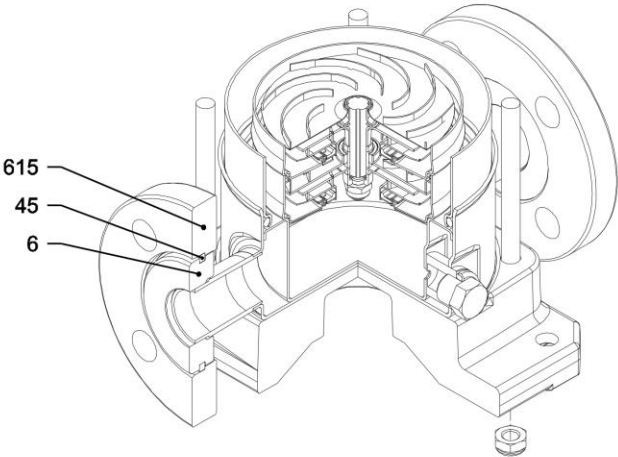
Replacement of Shaft Seal RSV 32-45-64 without Bearing [-C-]
